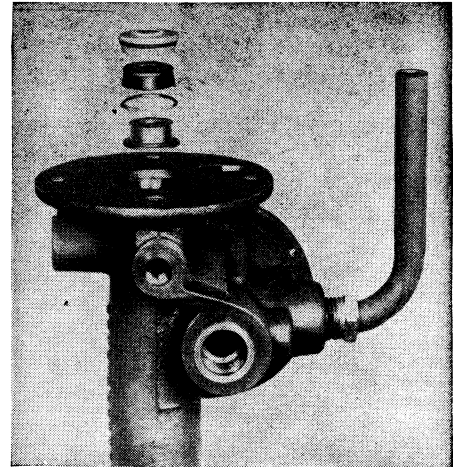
Replacing push rod guide, seal and rubber cup (2nd design)
